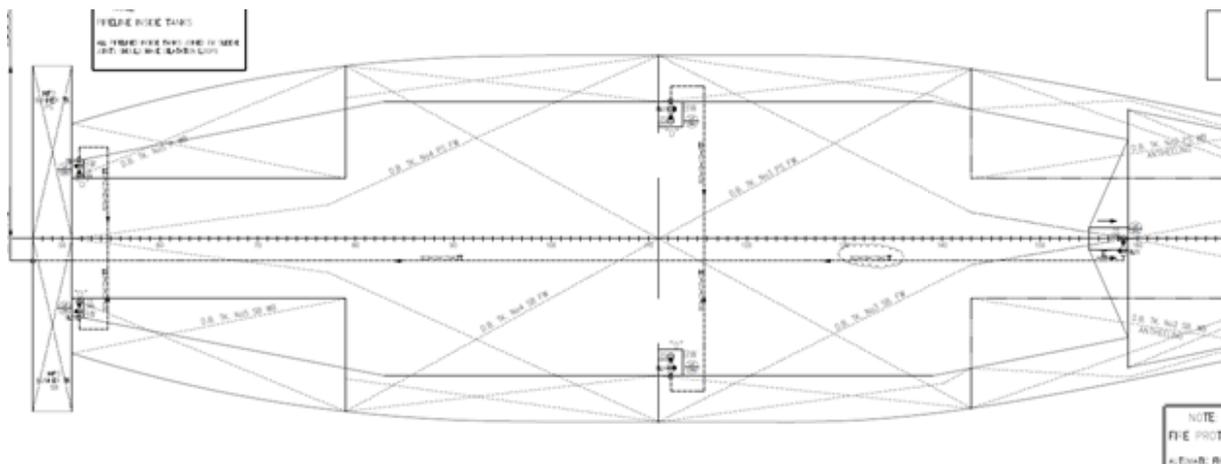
Bilge system in a lower hold of a vehicle carrier – example.
